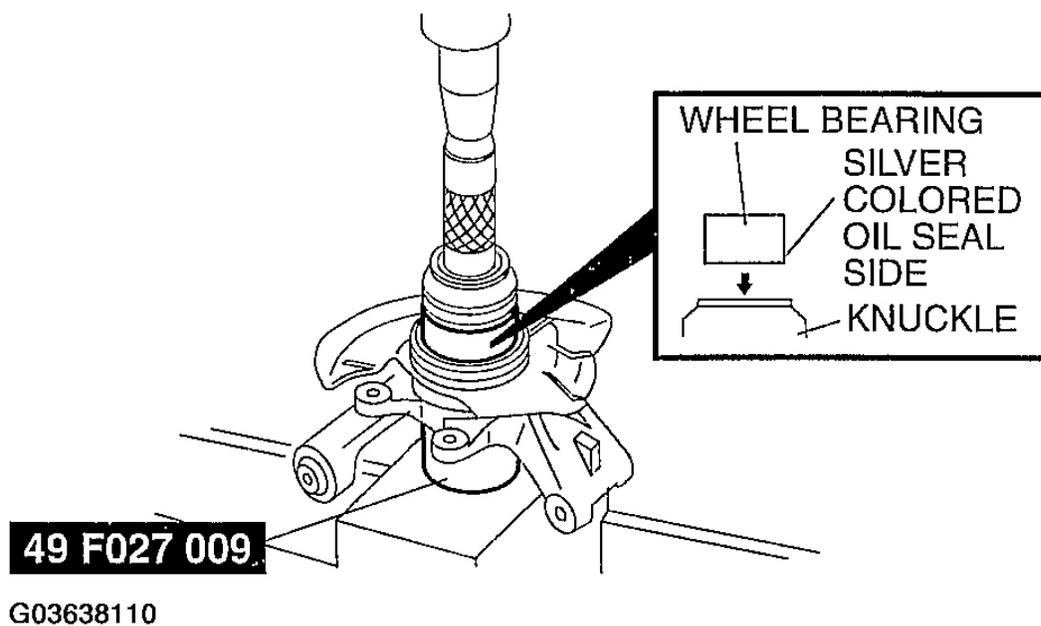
Installing New Wheel Bearing With Silver-Colored Oil Seal Side Facing Toward Vehicle
